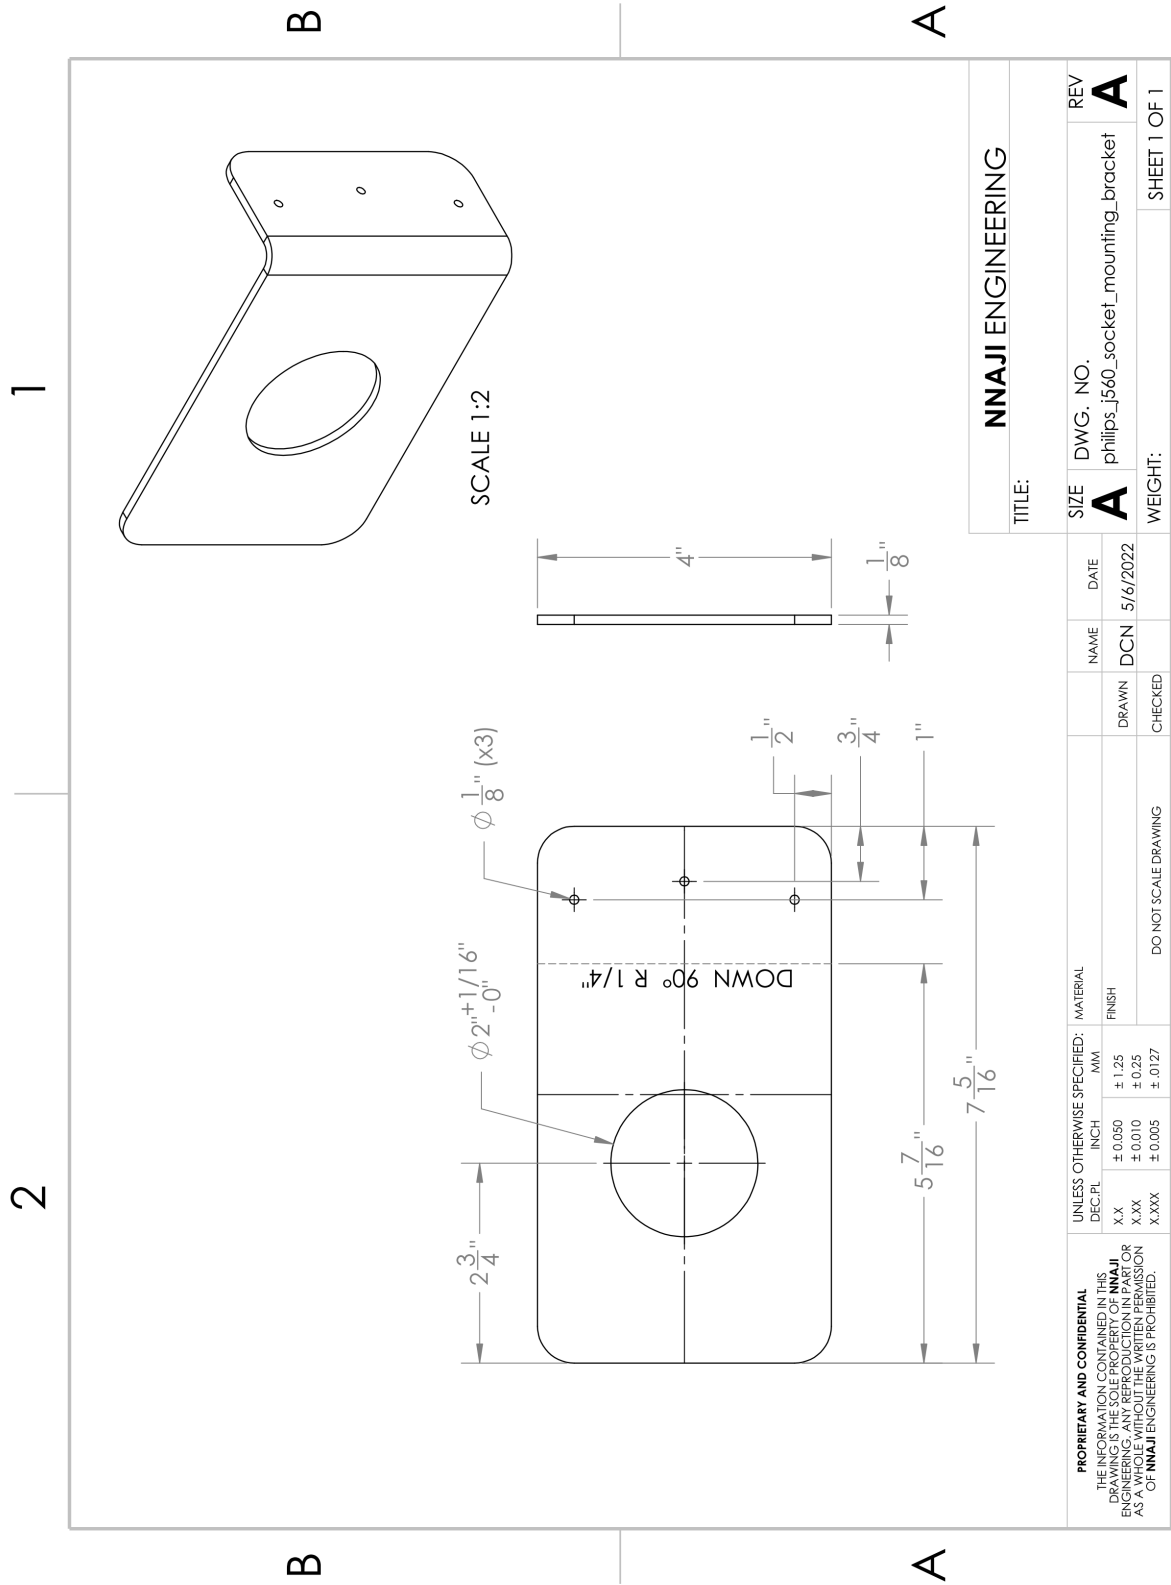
Mechanical Drawing: J560 Socket Mounting Bracket
